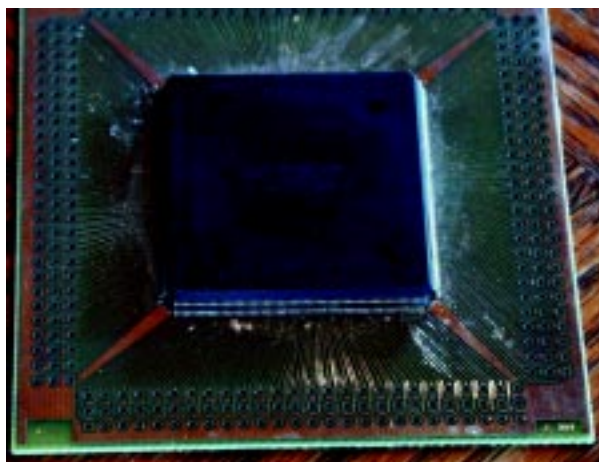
This dummy chip was mounted on my adapter using the solder-wick method. Even though it's not very hard, it pays to practice your technique with junk or dummy chips, especially using lower pin count and coarser pin spacing than this 304-pin monster.
